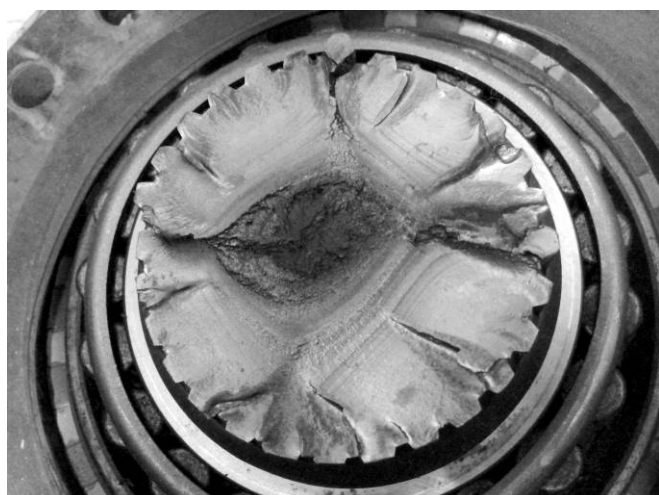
Macrograph of an axle shaft fractured surface with indicated fracture origins-initiation sites.
